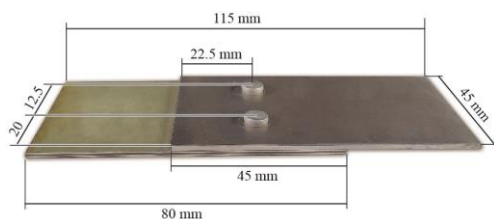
Specimens dimensions,  $\pm 0.1$  mm.
